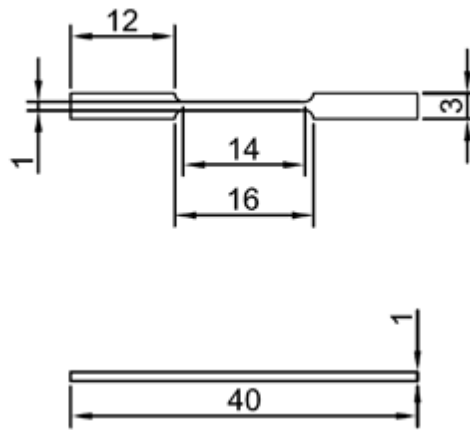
ETMT Test Specimen Dimensions (mm)
